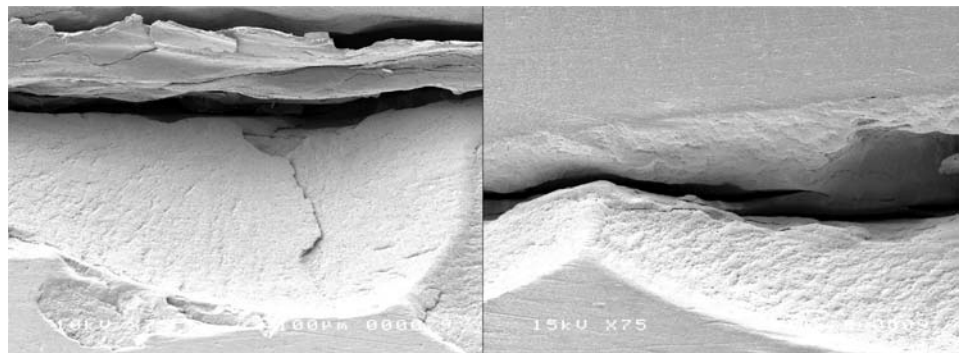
(a – to the left) and (b) SEM-SE pictures of the cracks. (a) Crack in tool sample A (b) Crack in tool sample B.
